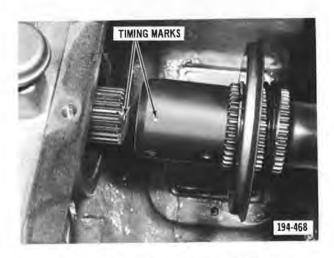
Aligning Timing "O" Mark on Rear Countershaft with Front Countershaft
